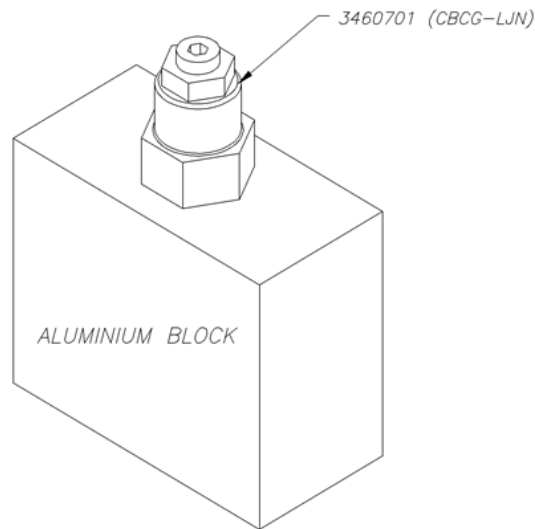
ADJUSTING THE PRESSURE RELIEF VALVE (CBCG-LJN)
